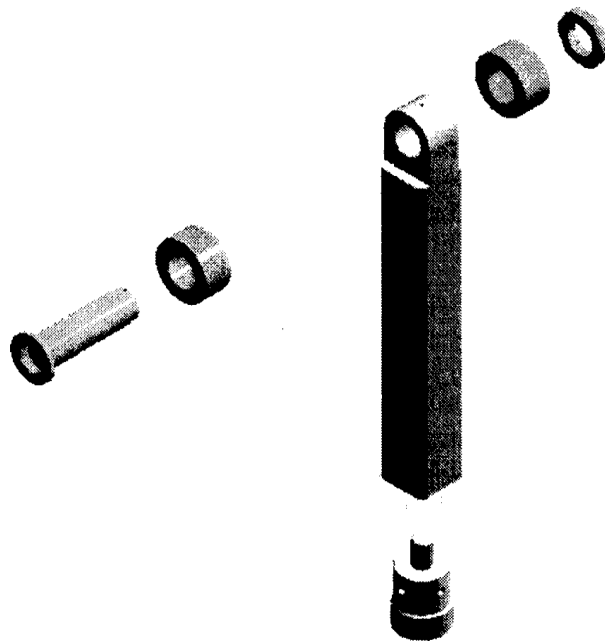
Exploded View of Upper Punch Designed for the 5.4-inch Rotary Press
